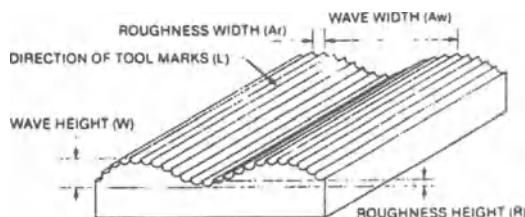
Terms used in Standard ASA B 46.1 for measuring mold surface roughness.
